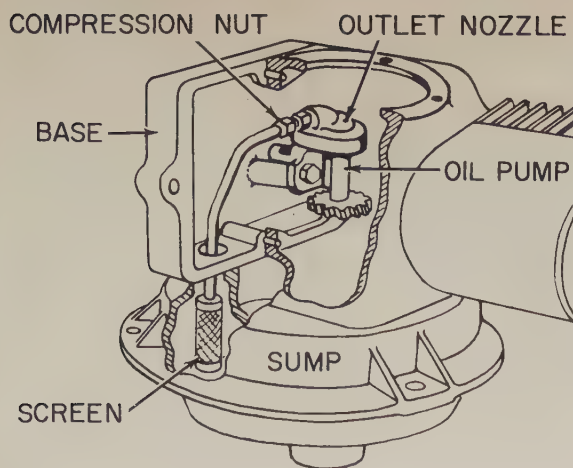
Gear-driven oil pump. (Briggs & Stratton Corporation)
